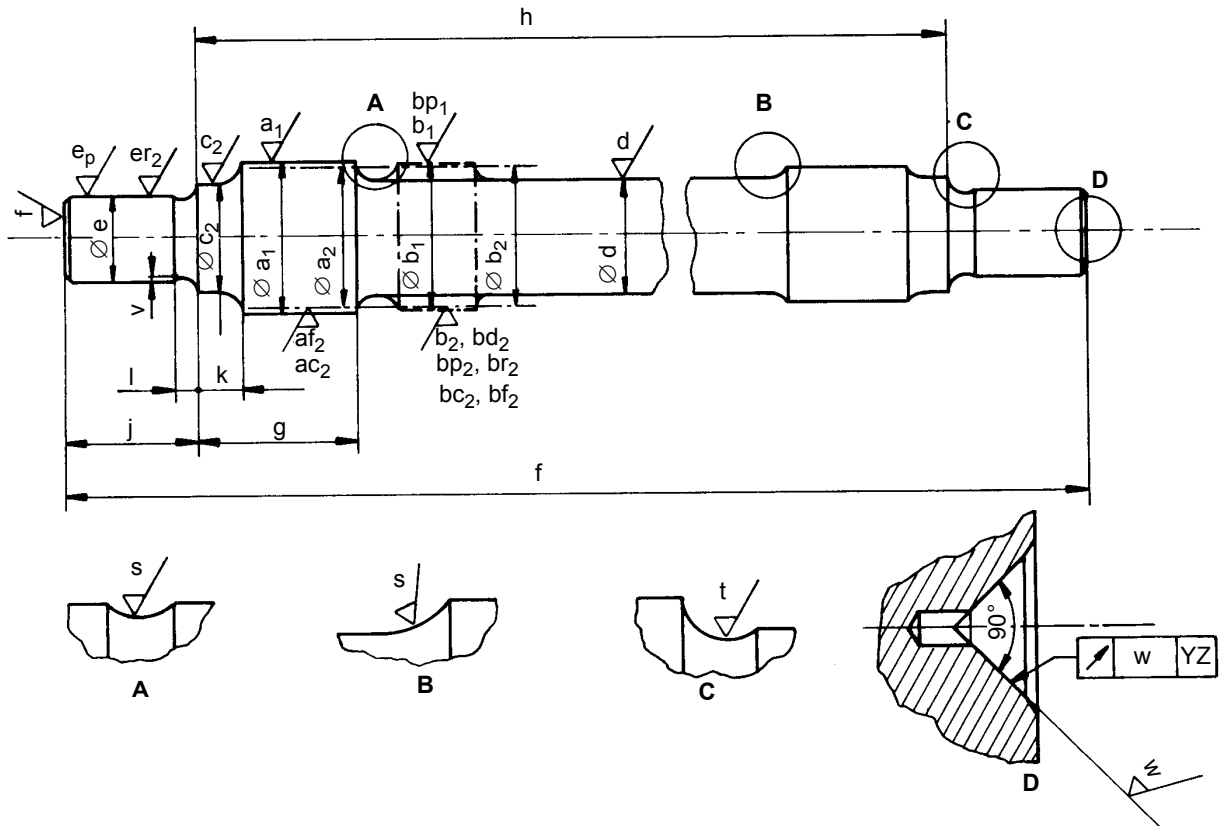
Symbols for the dimensional characteristics and surface roughness of "finish-machined" axles and "ready-to-assemble" axles
